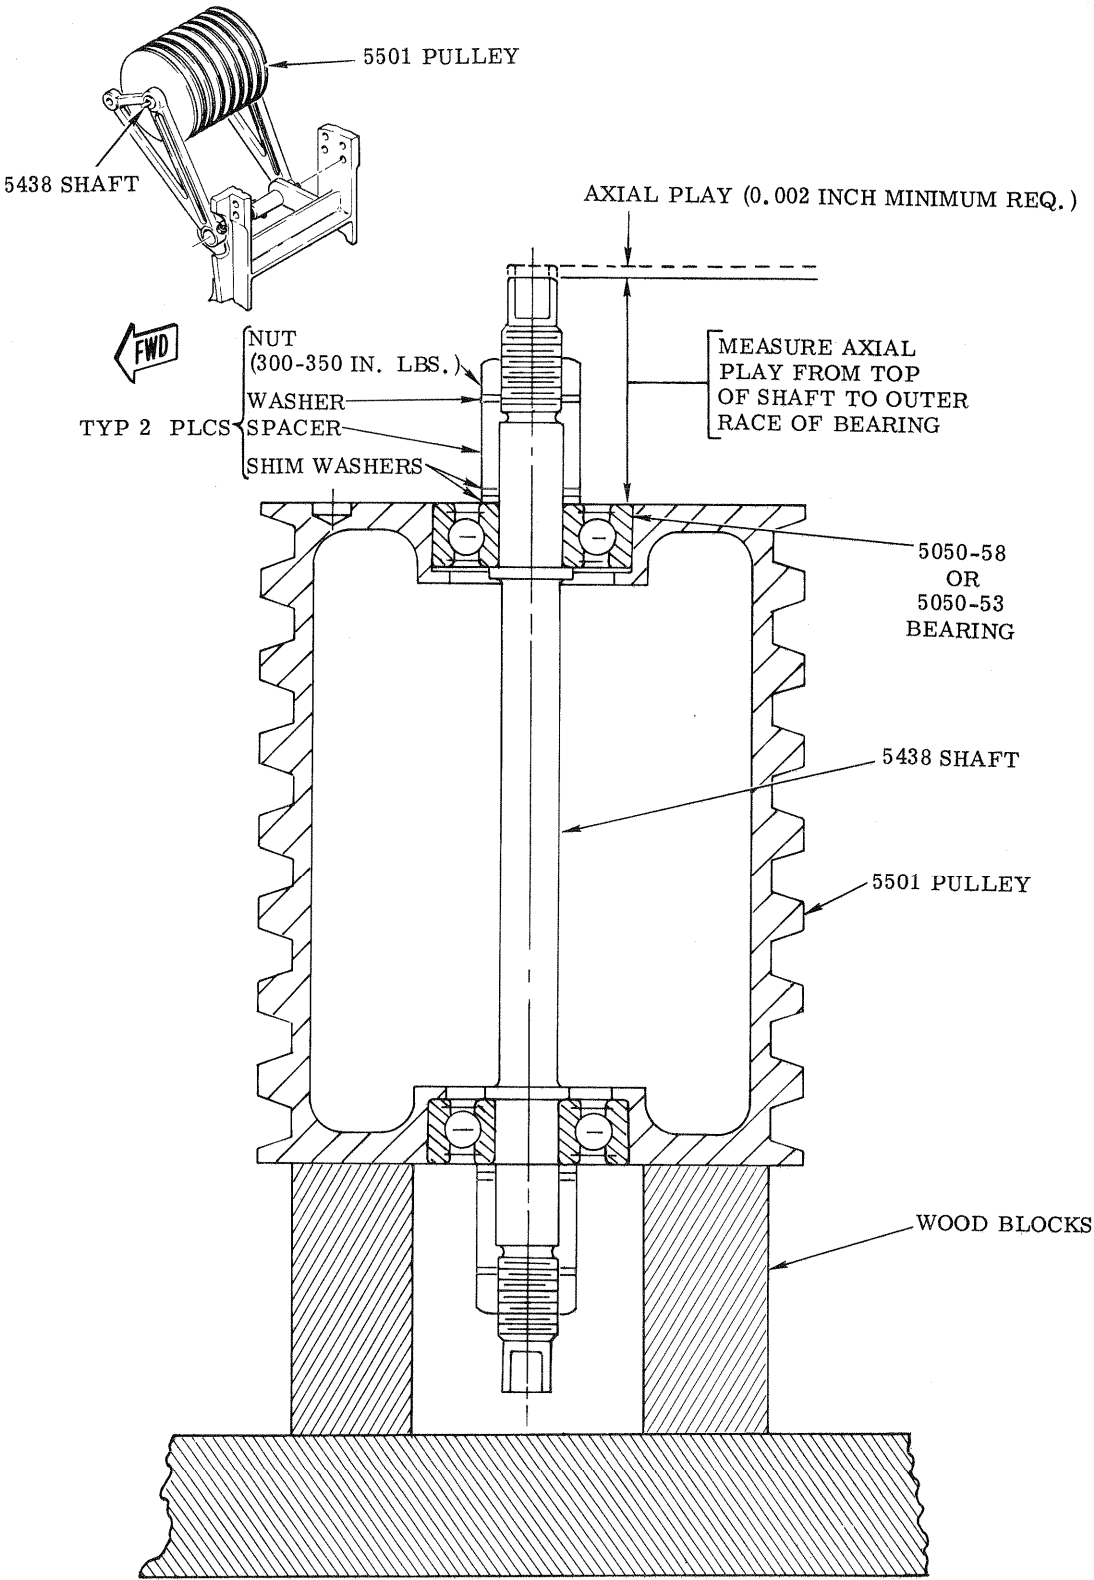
INSPECTION-IDLER PULLEY, AXIAL PLAY.
